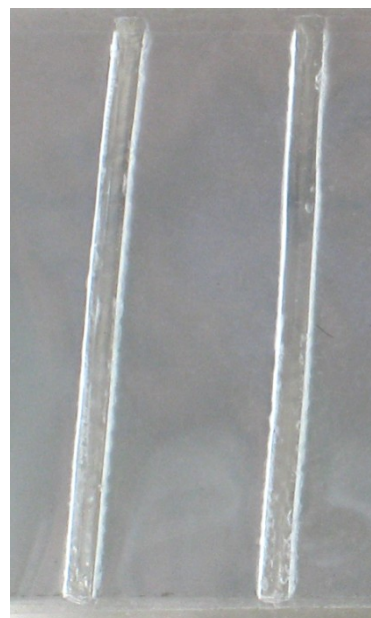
The appearance of the welding seam of the lavsan stripe made by the ultrasonic welding device with the chopper regulator
